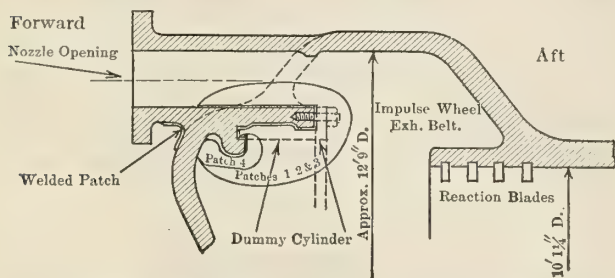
Approximate Section Through Nozzle Openings Showing Detail of Electric Weld Patches. Starboard H. P. Astern Cylinder Top Half
